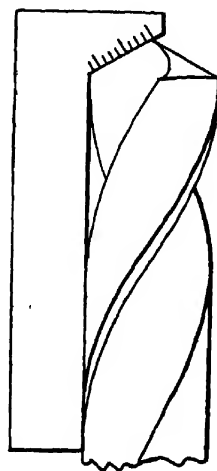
GRINDING GAUGE TO TEST DRILL FOR ANGLE AND LENGTH OF LIPS
